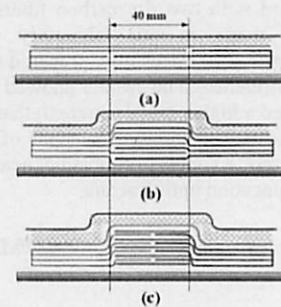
Joint group 2: (a) laminated joint-1, (b) laminated joint-2, and (c) multi-overlapped joint
